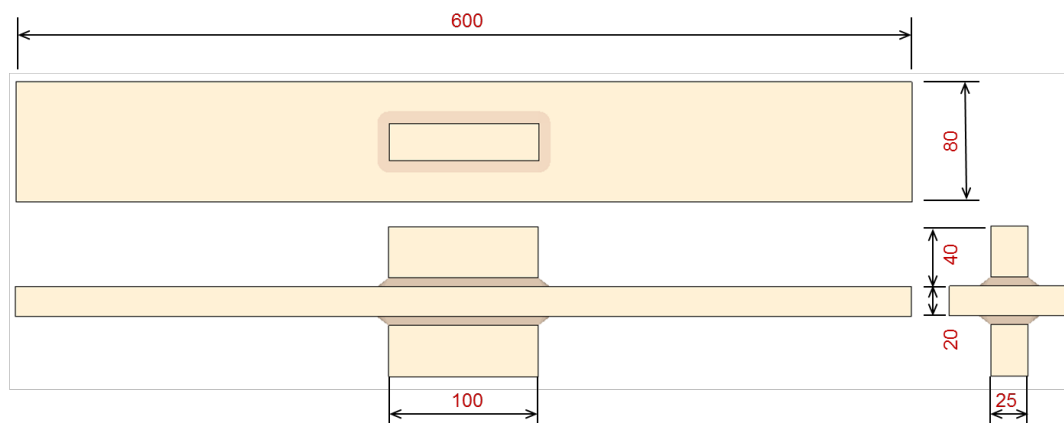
Dimensions of the gusset welding joint
